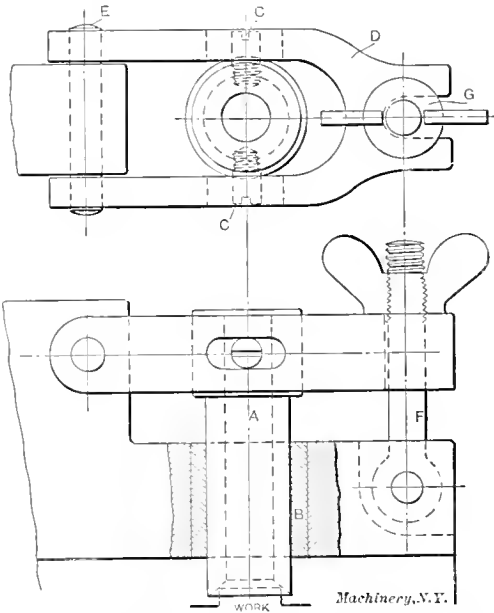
Sliding Bushing for Locating and Clamping Work.
